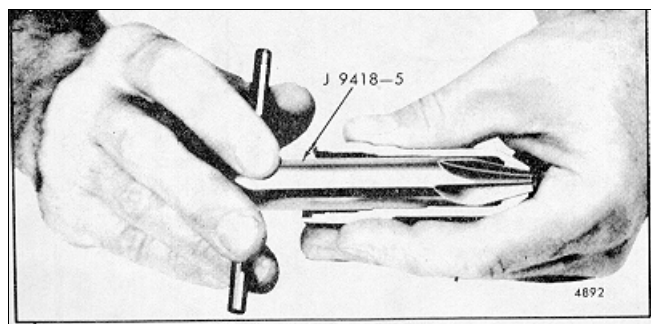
Cleaning Injector Nut Spray Tip Seat
